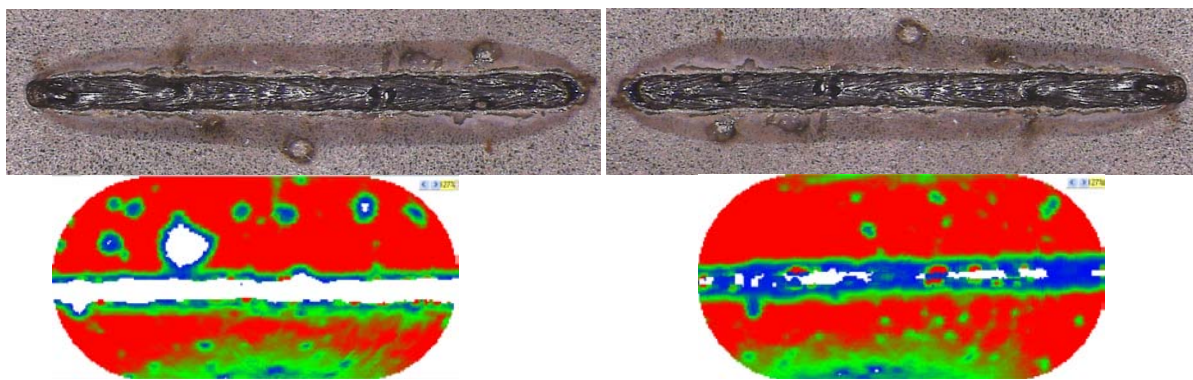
Weld top bead (0mm gap, sample C) and Amstech result from top bead (L) and bottom bead (R)
